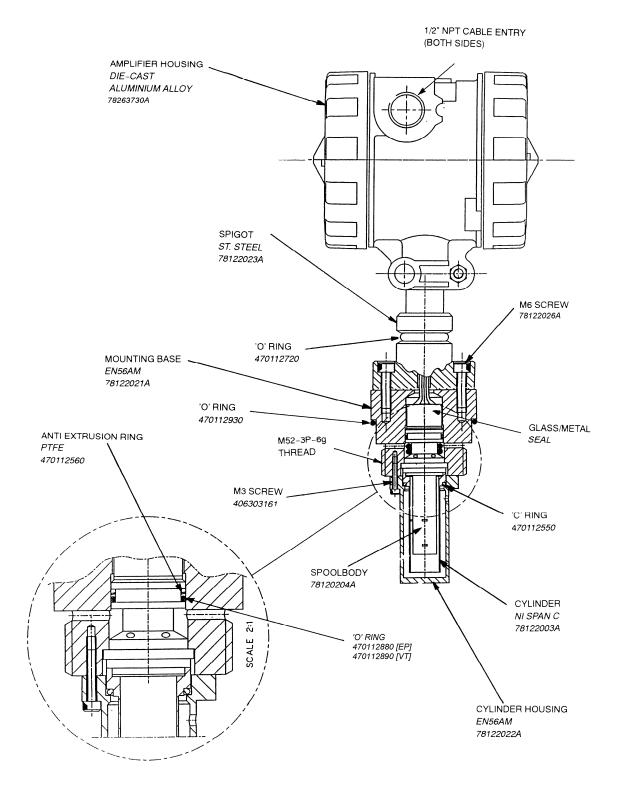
Cross-sectional view of 78125 Transducer showing part numbers for spares
